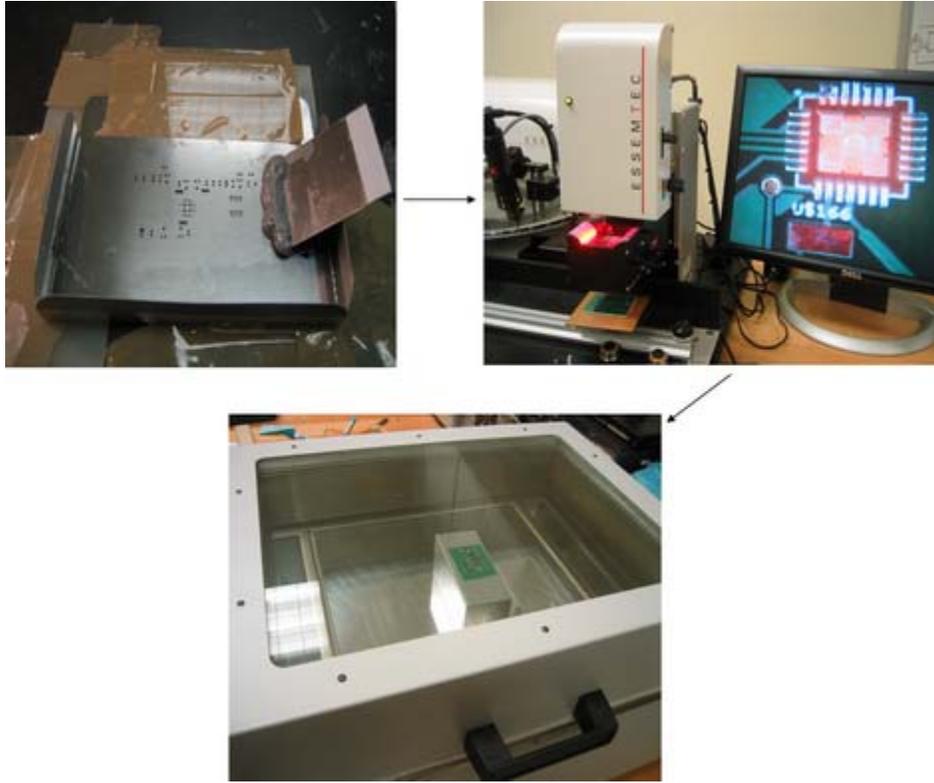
The process to solder surface amount components on PC Boards precisely.
